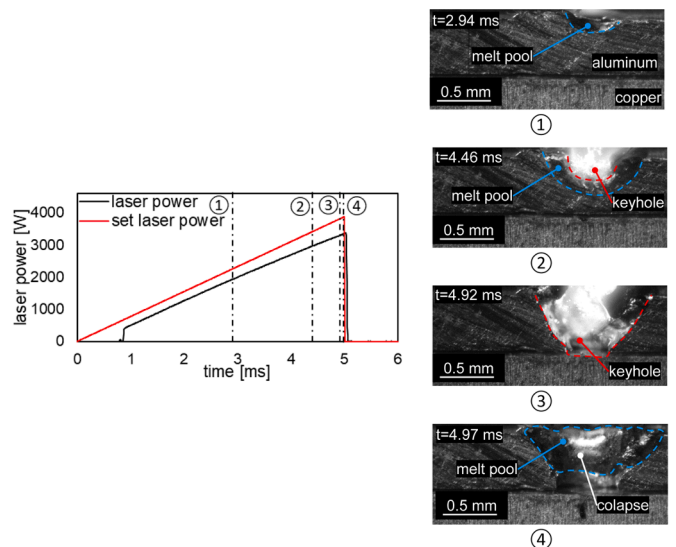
left: set laser power and real laser output. Right: single frames of the half-section process at different time steps. ❶ beginning of the heat conduction welding process. ❷ beginning of the deep welding process. ❸ Keyhole reaches the lower joining partner. ❹ collapse of the keyhole.
